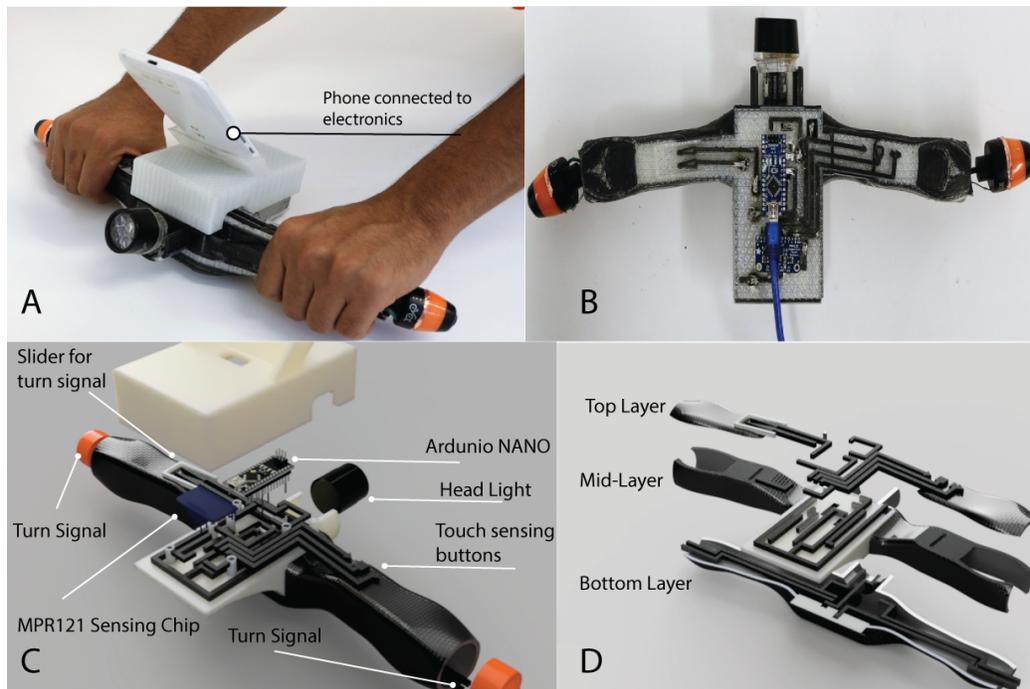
A user holding a full body bike handle bar with embedded carbon fiber circuitry and touch controls. b) Shows the top view of the circuit with components placed on top of the circuit. c) Shows an exploded view of the electronic components which include: headlight, turn lights, and printed touch controls, printed slider, Arduino Nano microcontroller, MPR121 touch sensing board and mobile phone casing. d) Shows three layers that go into the handle bar circuitry printed over layer by layer and connected by vias.
